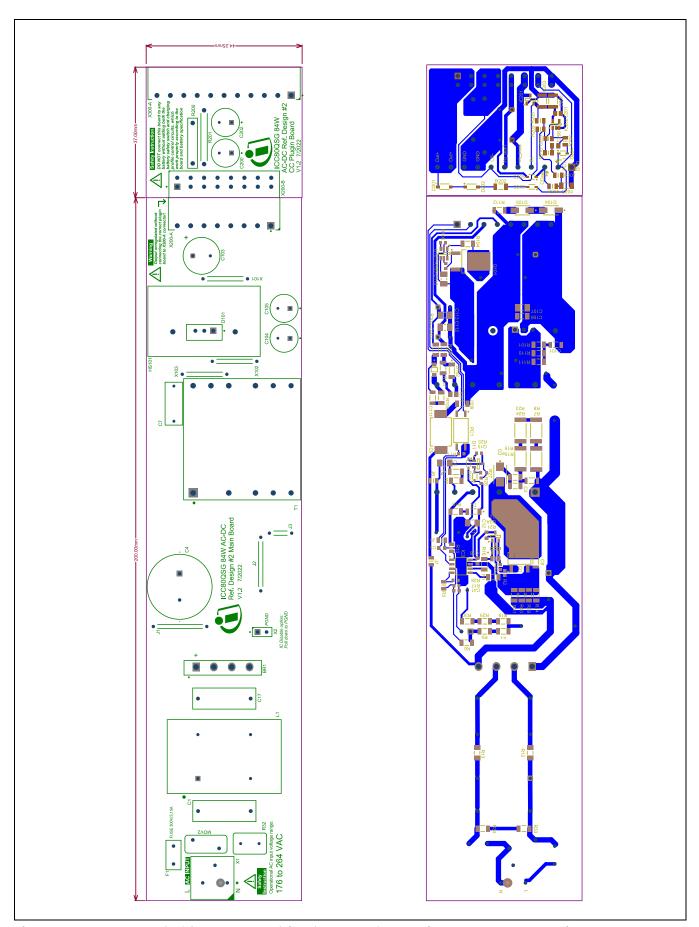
PCB top (left) and bottom (right) layout of the main board and CC plug-in board
